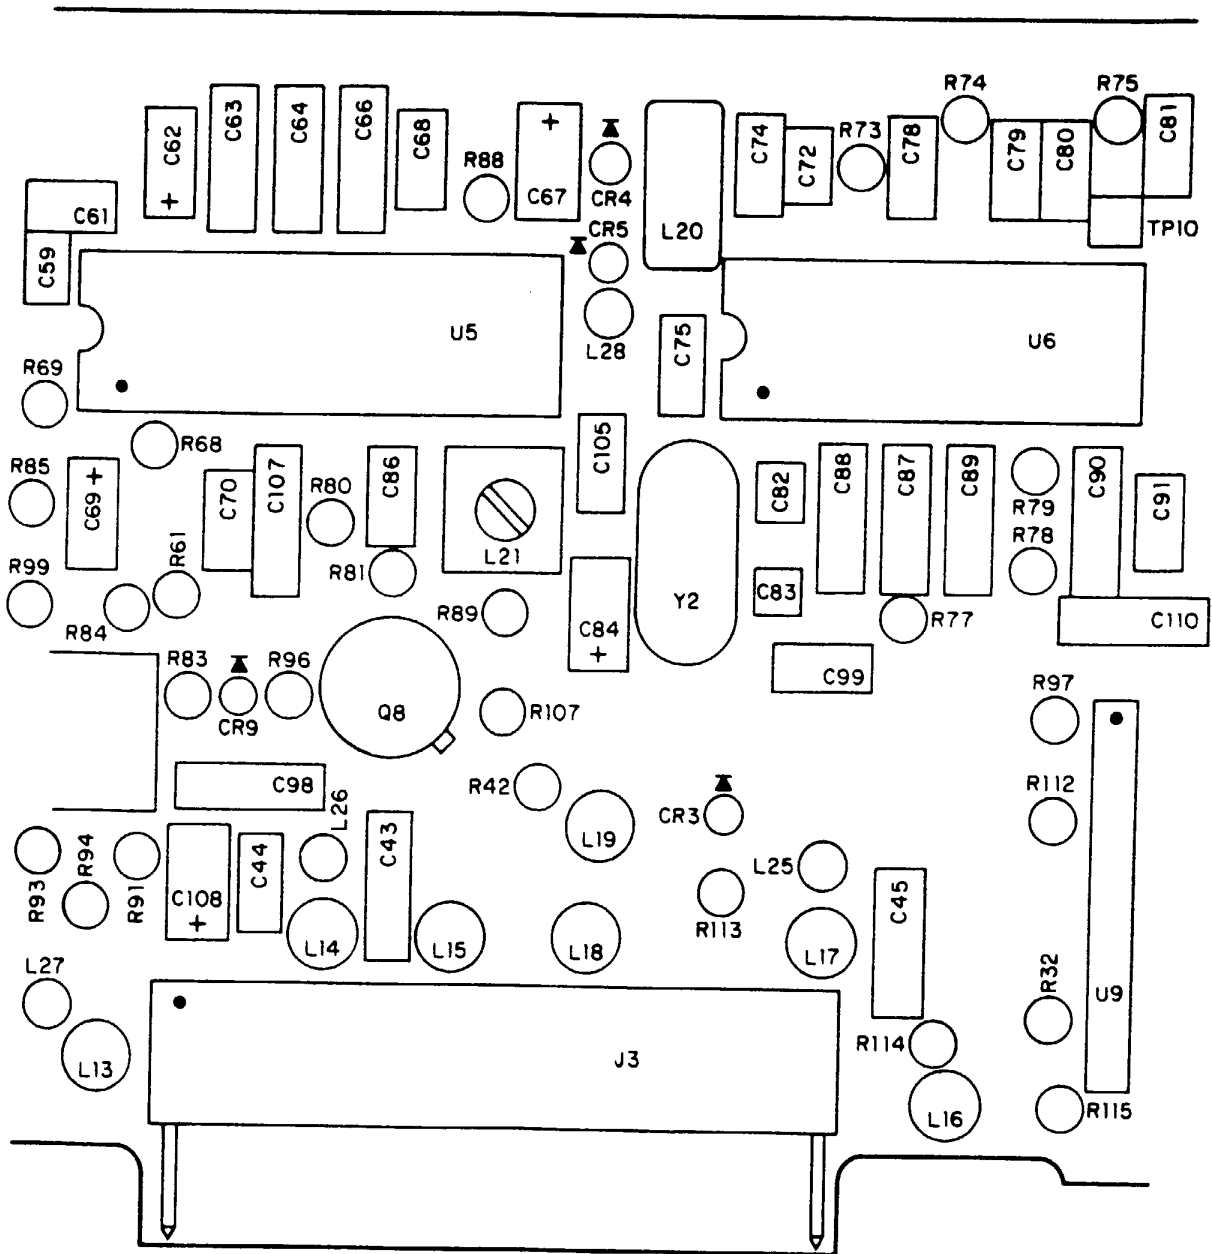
Guard Receiver Assembly A1A1A5 Component and Test Point Location Diagram (Sheet 1 of 5)
